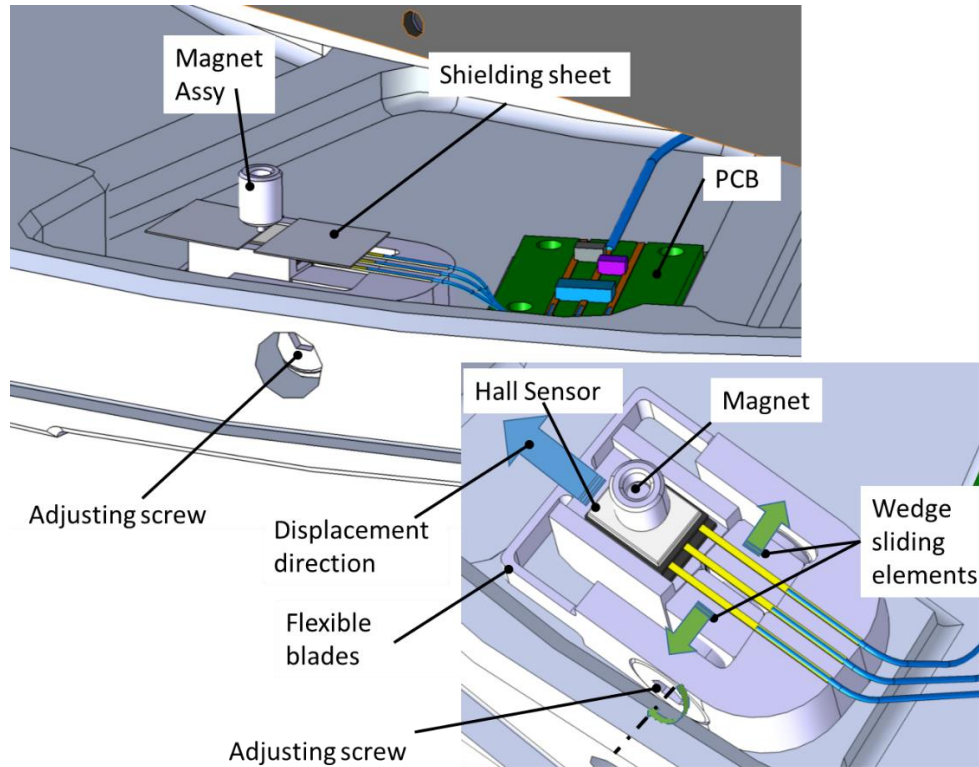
Hall sensors adjustable support. (Magnet Assembly is located on the rotor)
